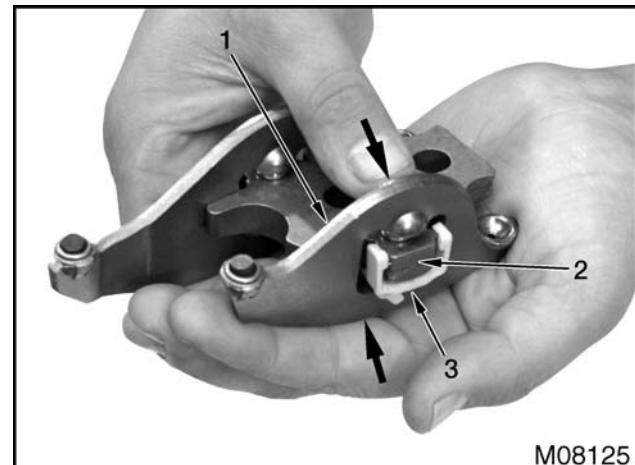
Separation of rocker arm assembly from dual rocker fulcrum plate (typical)
